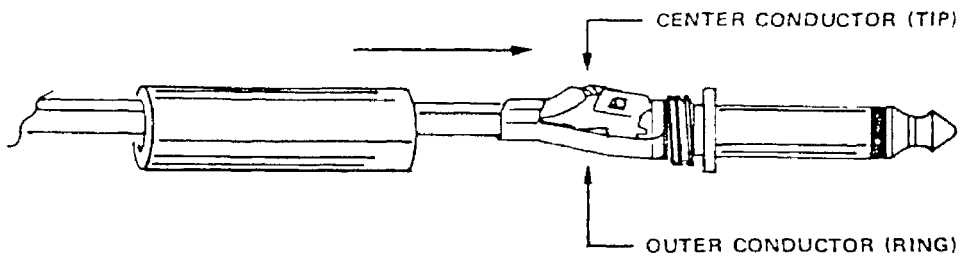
ATTACHING CABLE TO PHONE PLUG CONNECTOR
